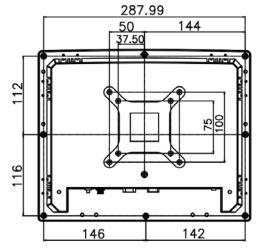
AFL-12A-N26 Dimensions (mm)
